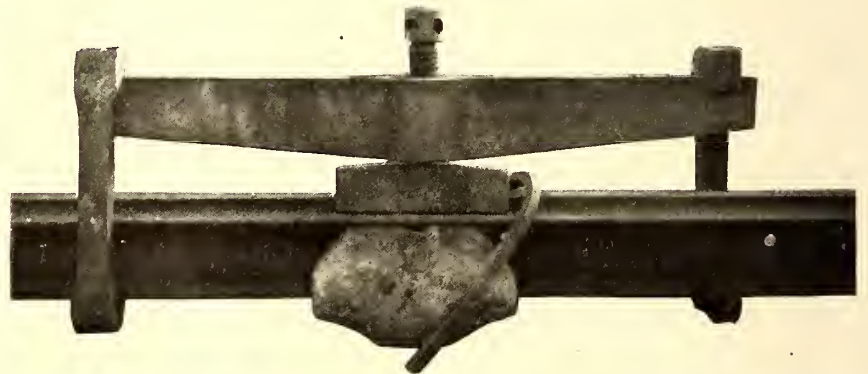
MOLDS AND CLAMPS READY TO CAST-WELD, RISER SIDE
